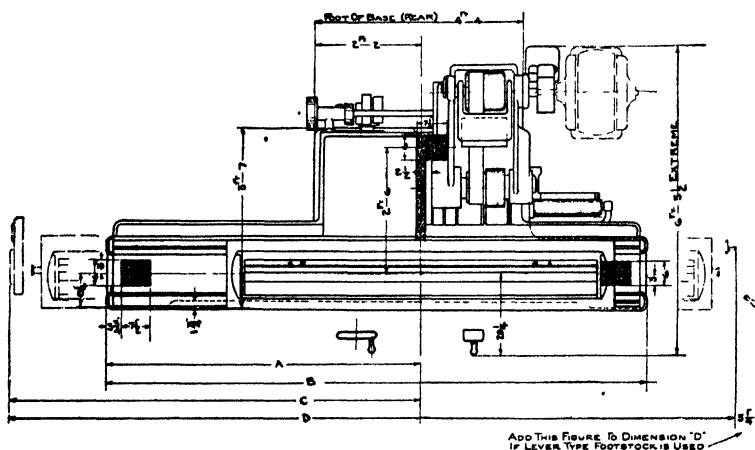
Norton cylindrical grinder, 14 by 72 in. type A. Power traverse, machine arranged for motor drive, with motor-driven headstock. (Courtesy of the Norton Company.)
